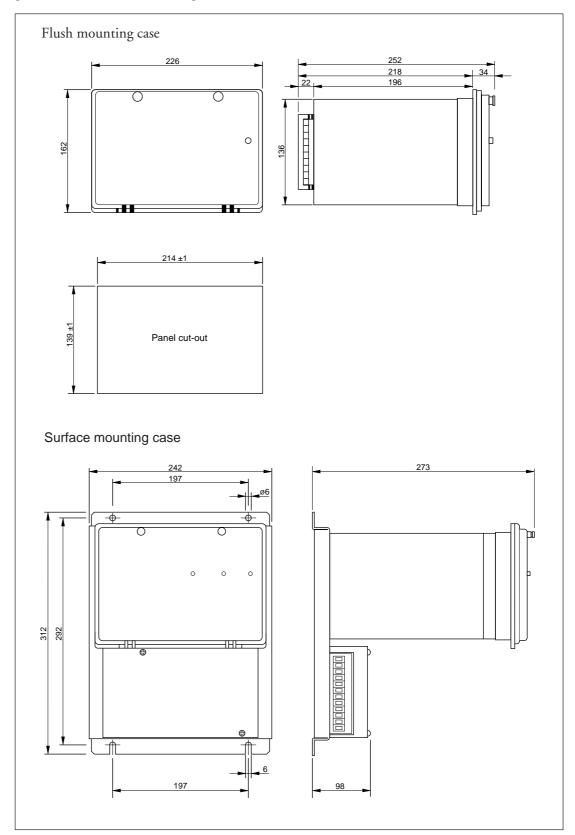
Dimensional drawings for mounting cases of the feeder terminals type SPAC 315 C and type SPAC 317 C
